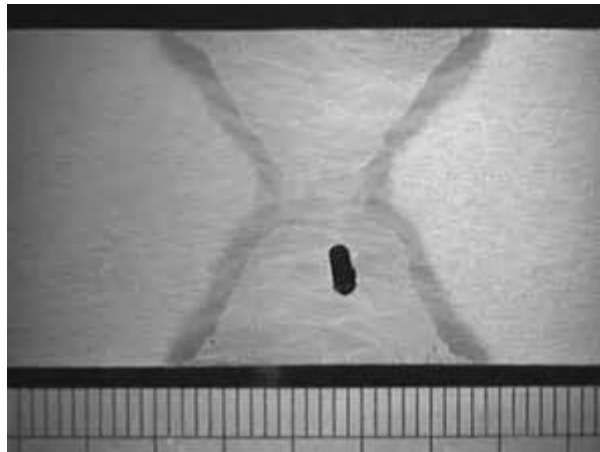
Cross section of a welding inclusion (by Lucas W., Marcello Consonni, Chen Fun Wee and Charles Schneider, Courtesy of TWI Ltd.)
